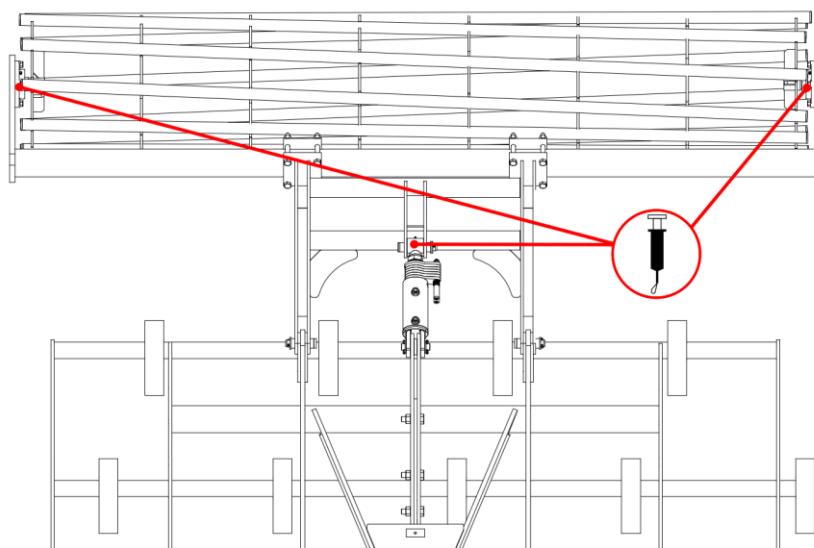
Lubrication points of the cultivator SUPER non-folding version (with tubular roller option)
